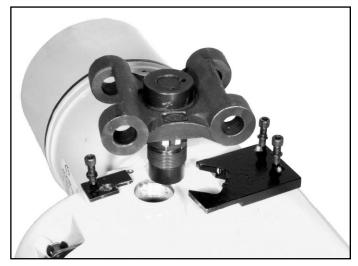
Removing Suspension Lug (1/4 through 1 Ton Models)
